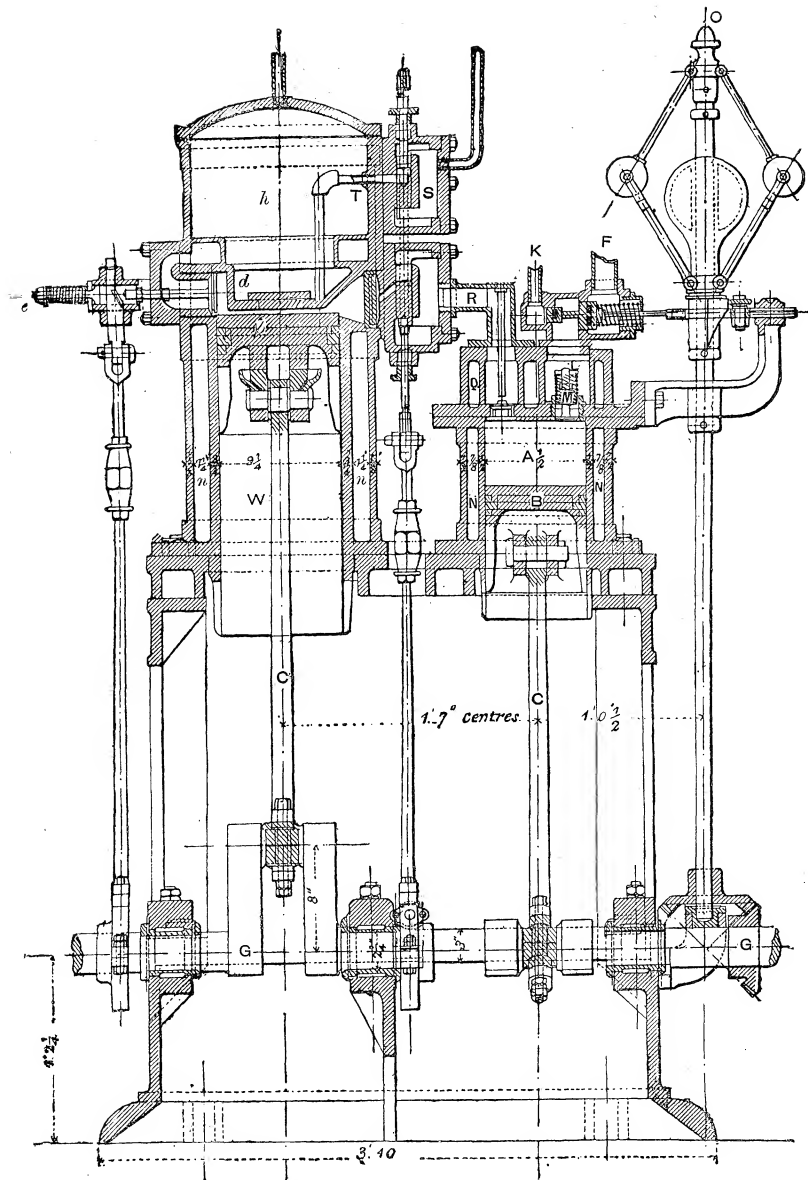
Sectional View of the "Eclipse" Gas Engine.
